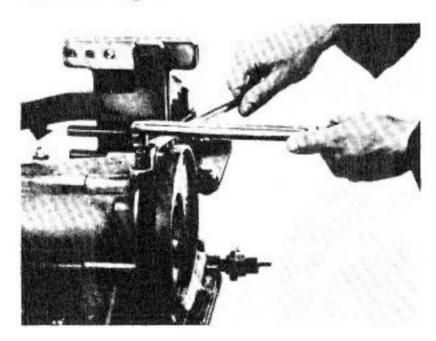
Torquing 1st and reverse brake band adjusting screw. Arrow indicates 2nd gear brake band screw.
